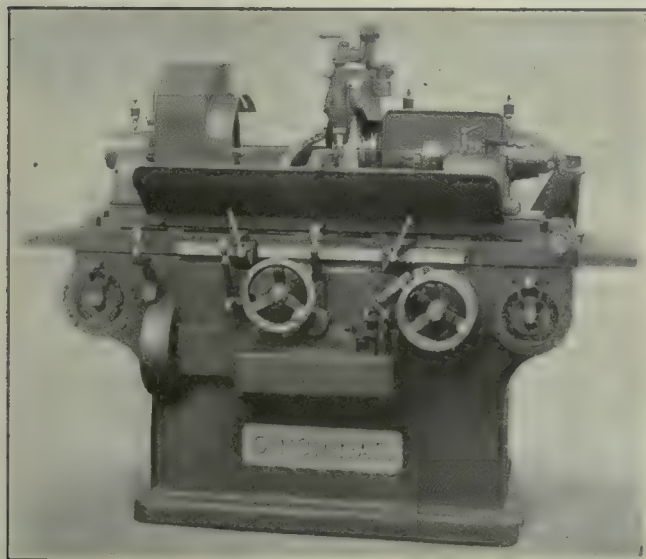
CINCINNATI 12-INCH PLAIN CYLINDRICAL GRINDING MACHINE
